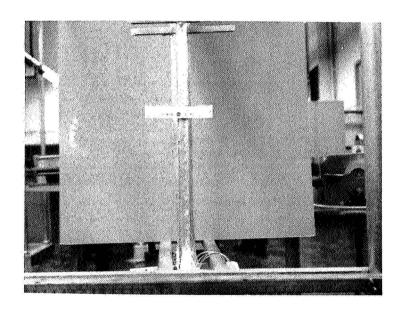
OMNIWEAVE I BEAM FABRICATION - OVERVIEW
